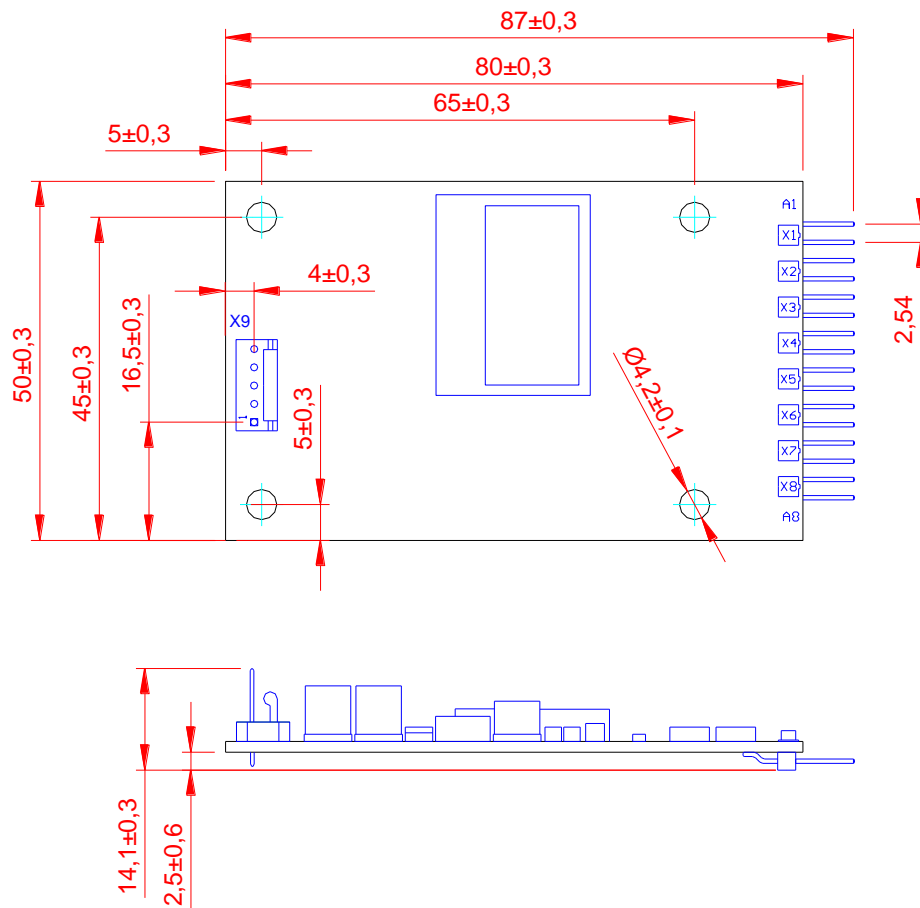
Dimension of the Readermodul ID ISC.M02.M8-B
